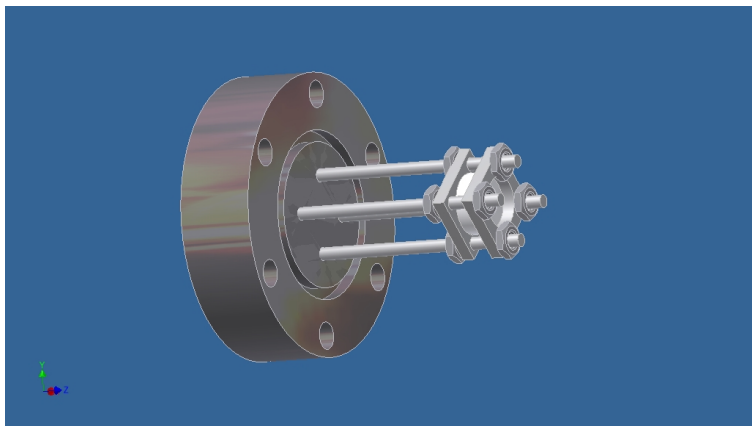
$\text{Si}^+$  sample holder made from modified 2.75" CF blank. Design due to Jason Nguyen. The flange surface is tapped to accept four threaded rods and custom fabricated plates mount onto the rods and clamp onto the  $\text{Si}^+$  sample and allow mm scale tuning of the sample location.
